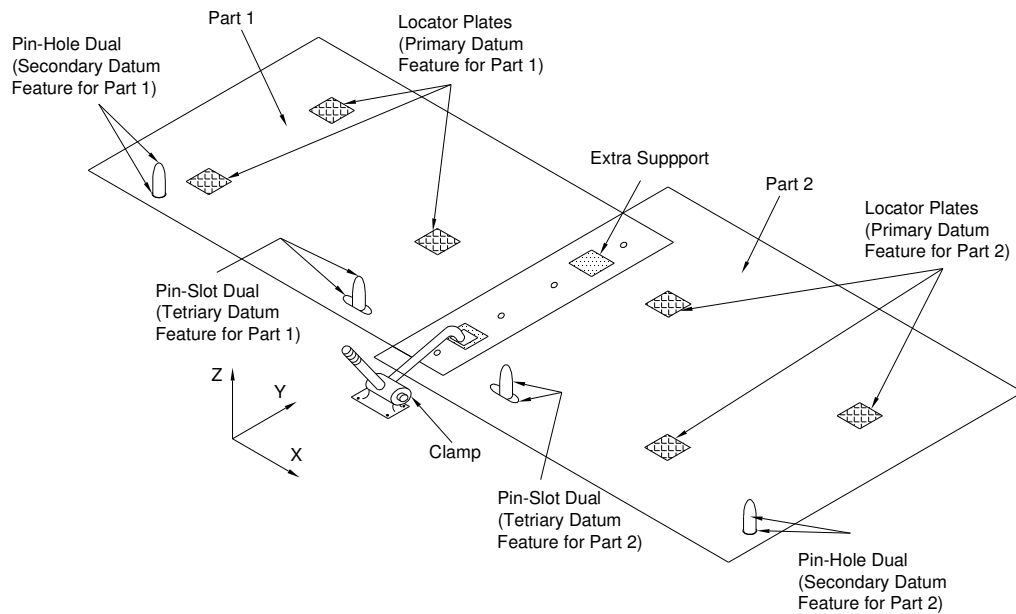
Locating and Clamping Illustration of Sheet Metal Parts on an Assembly Fixture
